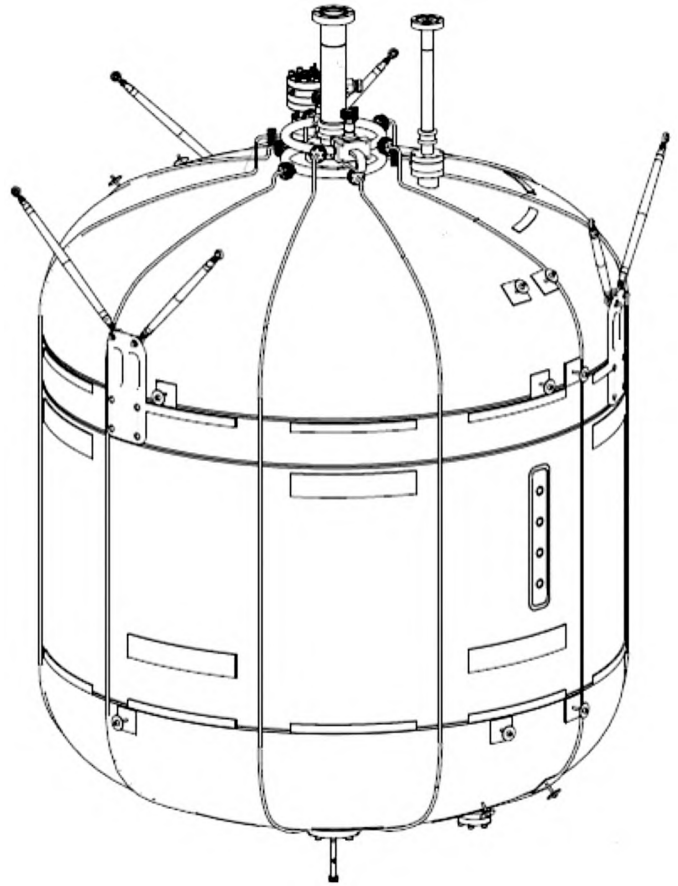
Test tank with cooling network tubing affixed to tank wall.
